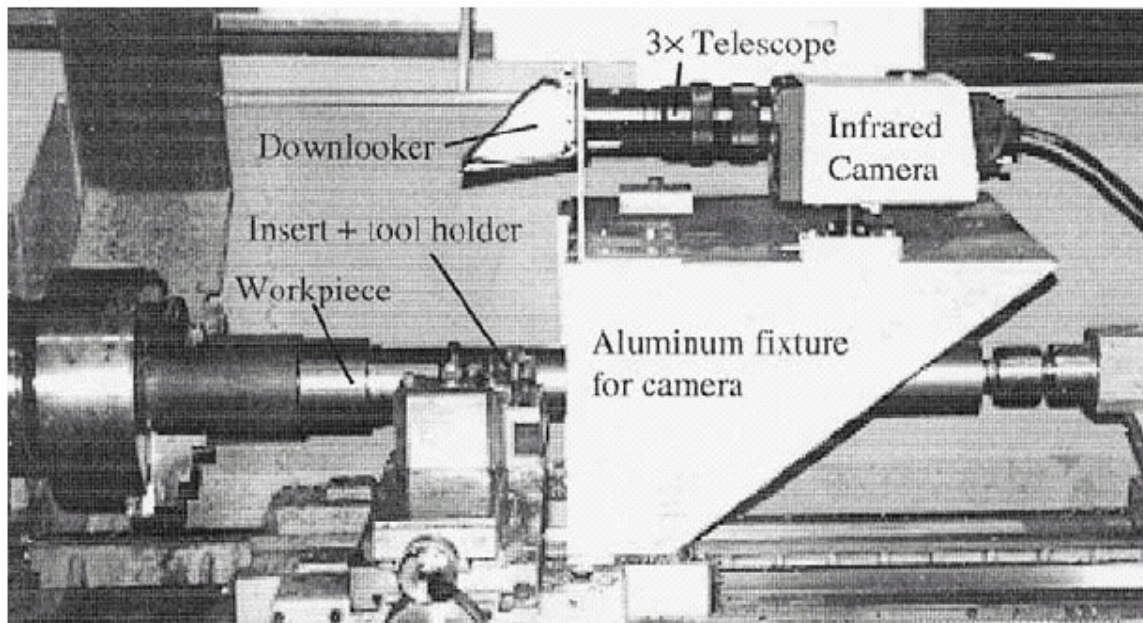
Machining set-up used to measure the rake face temperatures in machining of SAE 1045 (after Kwon *et al.* [16])
